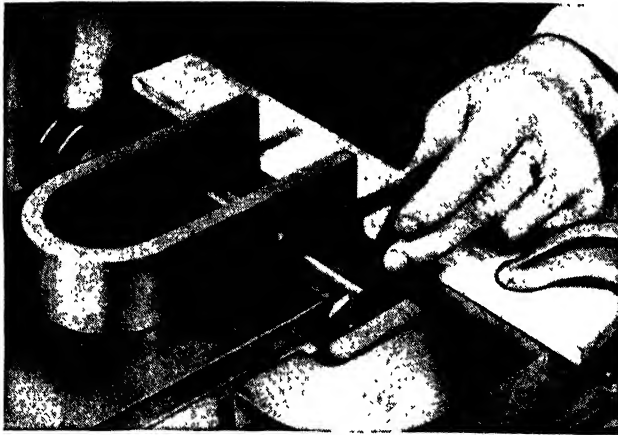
Setting a knife in the cutter head with the aid of a magnet. (Delta Power Tool Division, Rockwell Manufacturing Company)
